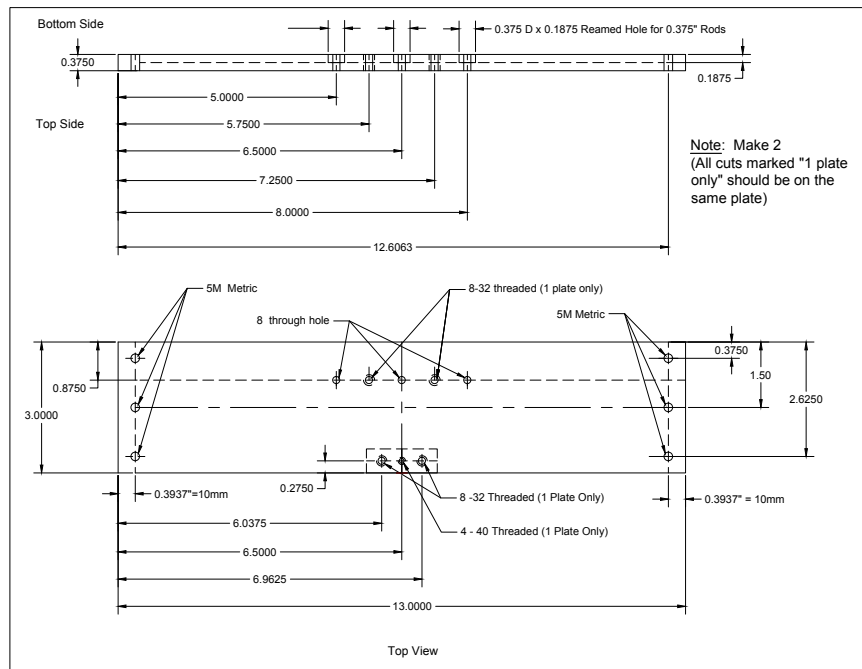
Aluminum, structure end plates to support parallel rods and connector brackets of the beam load cell
